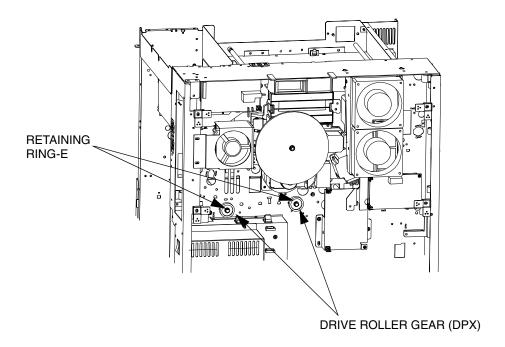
Removal of the Drive Roller Gear (DPX)
